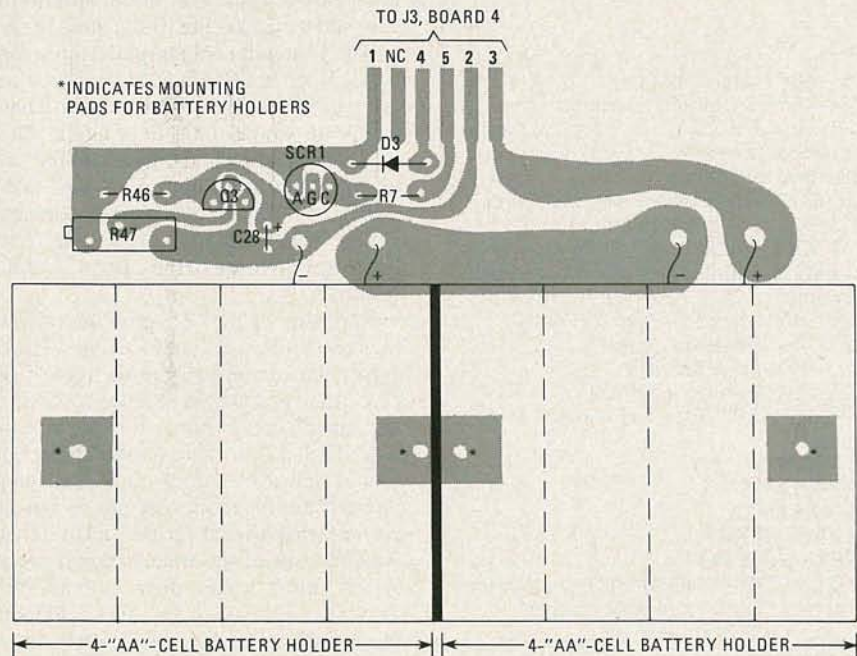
THE BATTERY HOLDERS are mounted to the pads indicated by asterisks in this parts-placement diagram for board 3.
